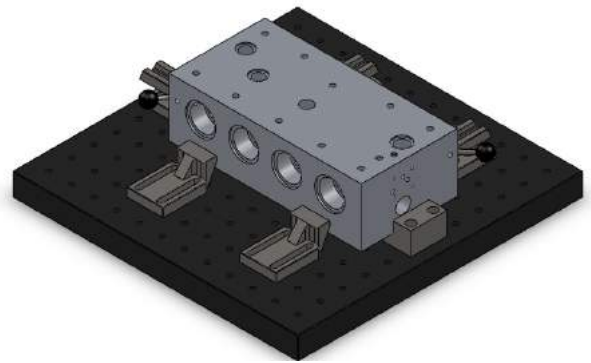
Designed configuration of modular fixture for the hydraulic control valve block.
